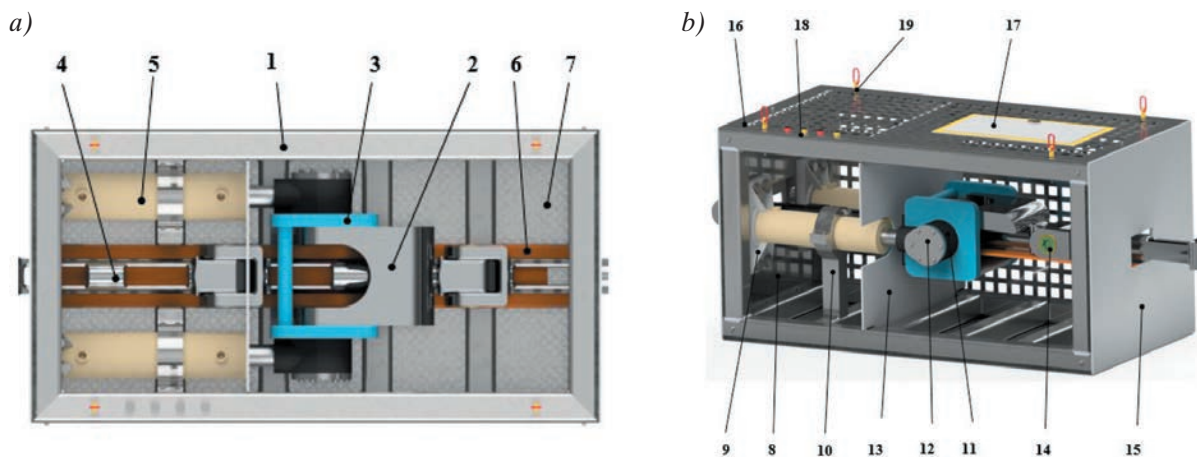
Cracking machine, views: a) without top cover; b) without side cover
